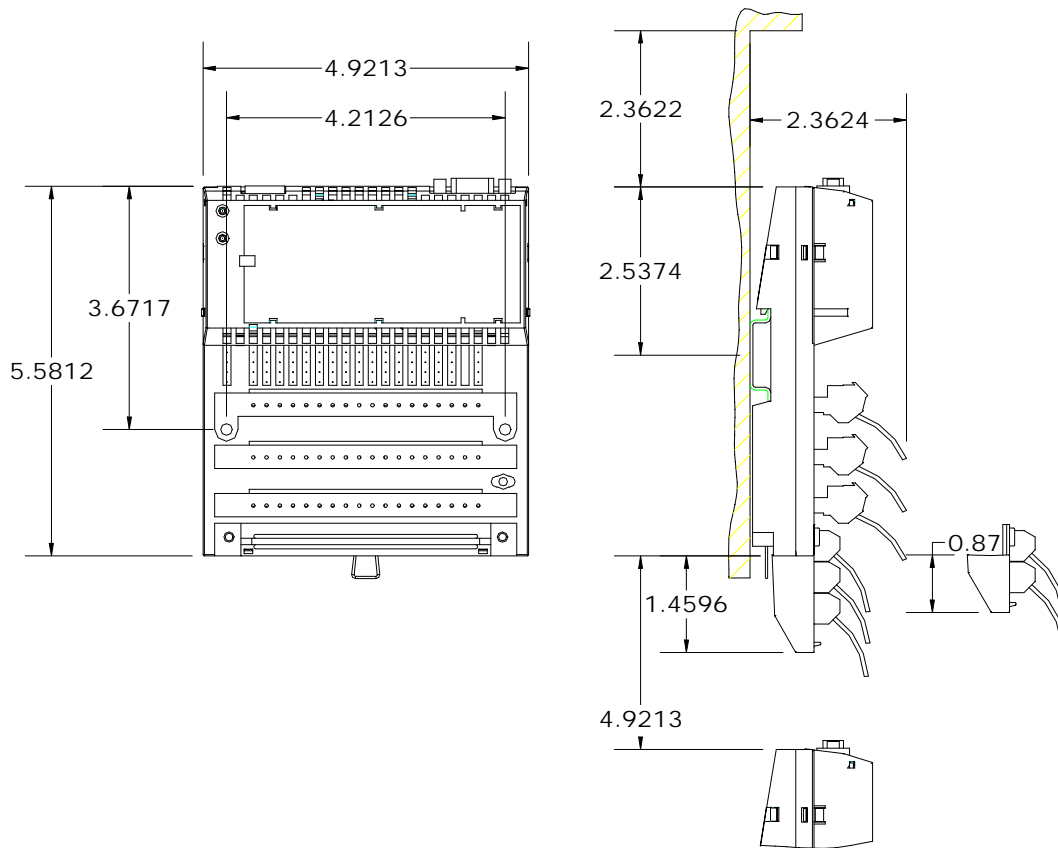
IFC 210R Momentum Module Dimensions (1003-02)
